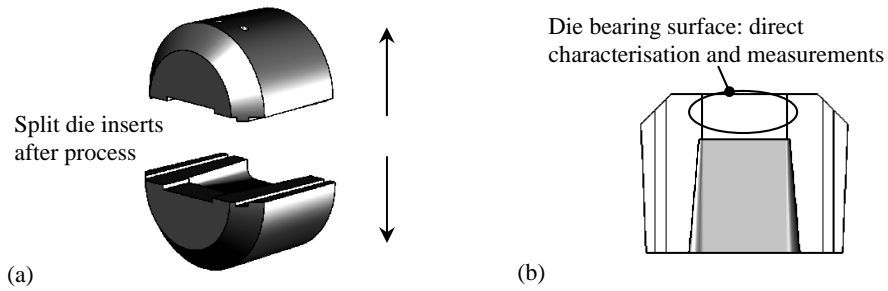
Split die inserts after extrusion for bearing surface characterisation.
